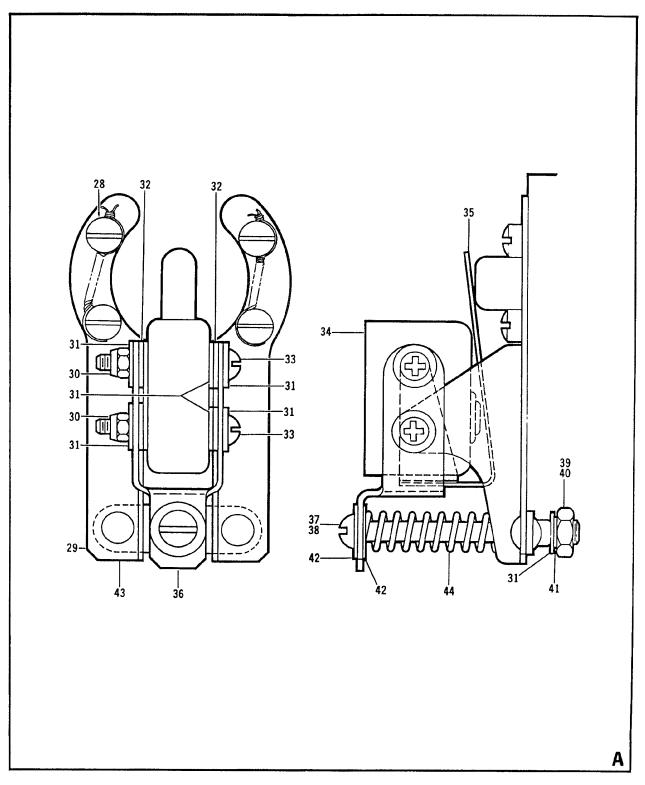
Brake assembly, rotor (Sheet 1 of 2)
